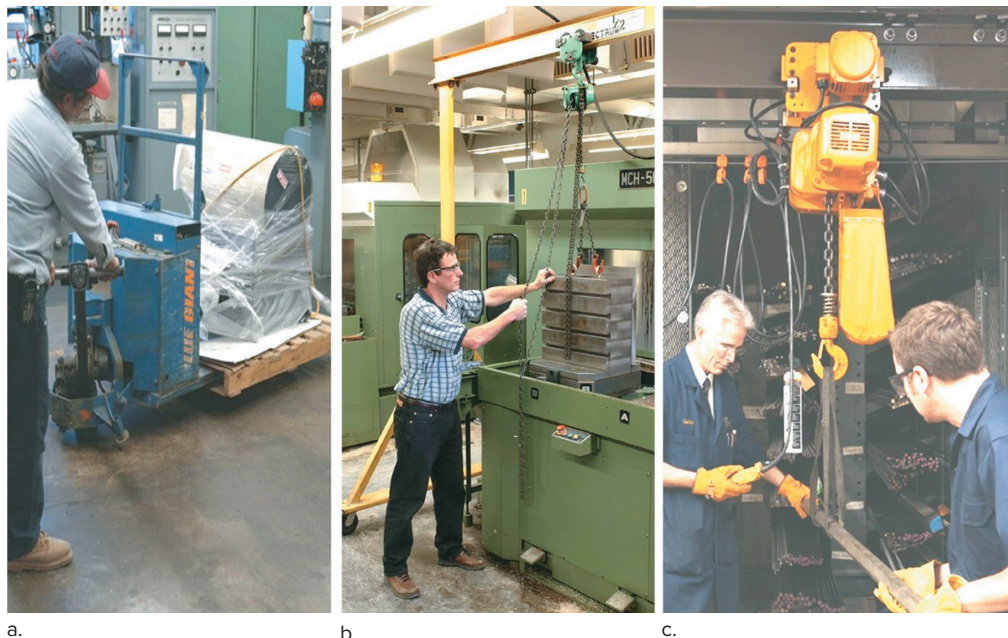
Smart machinists use equipment, not muscle, to lift heavy objects. ©McGraw-Hill Education/Photography by Prographics at Milwaukee Area Technical College
